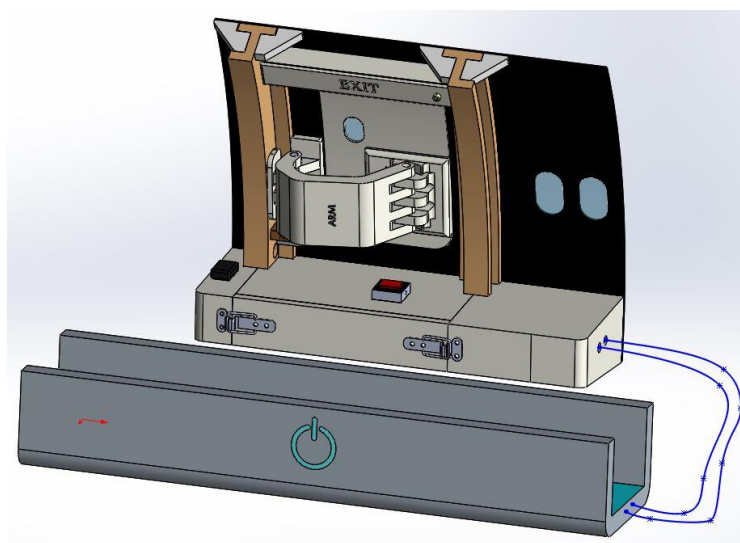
CAD model showing the scaled fuselage door assembly and multifunctional C-section beam (60 cm long)
